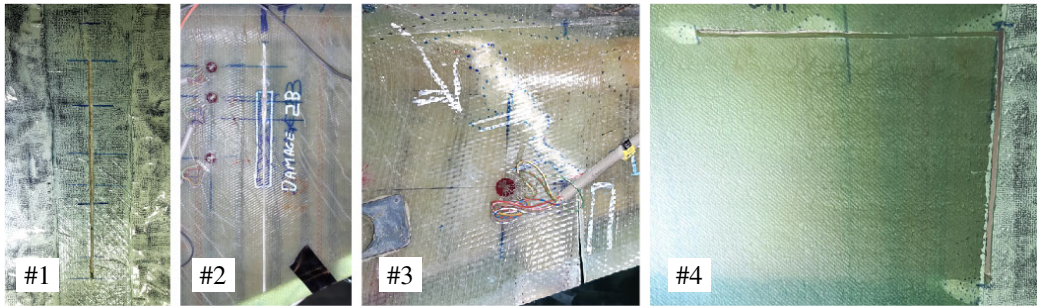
Investigated damage cases. #1: Transverse crack in pressure side shell. #2: Transverse crack in web start. #3: Transverse crack in web start. #4: Transverse/longitudinal crack in leading edge shell.
